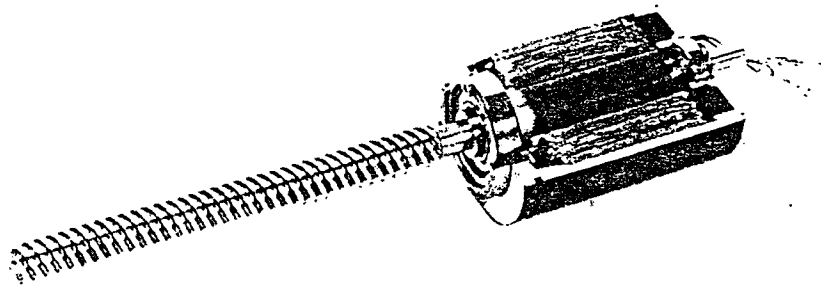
Cutaway view of a single-stack VR motor. (By courtesy of MINEBEA Co., Ltd.)
